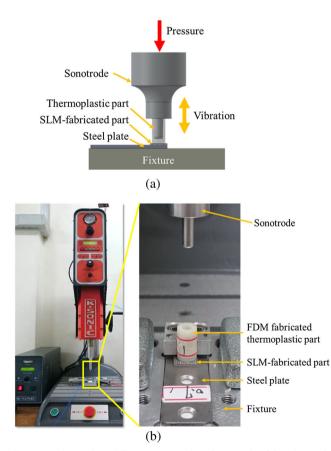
a Ultrasonic welding process and b photograph of the ultrasonic welding experimental setup
